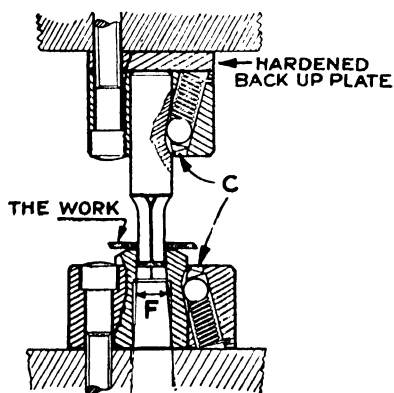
Section through vertical plane A-A in Fig. 112, showing the Richard Brothers' patented method for locking or removing individual punches and dies. Both the punch and the die are locked in a holder by the thrust of a compression spring behind a steel ball. Either the punch or the die can be unlocked and then removed by depressing the ball with a small rod that can be inserted through holes C. Broken members can then be replaced or different sizes and shapes of punches and dies substituted, without removing the main die from the press.
